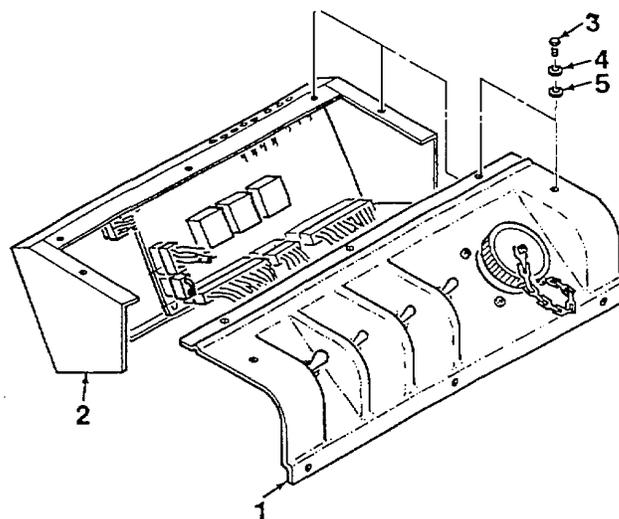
Switch Assembly (Sheet 1 of 3)
